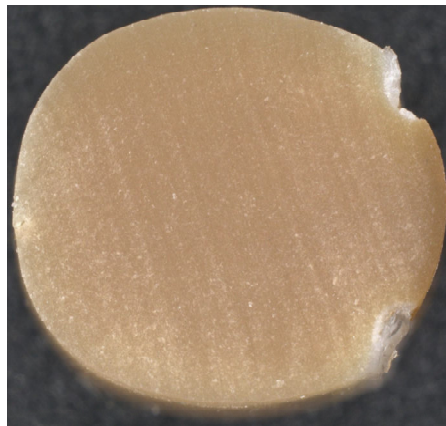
View of an O-Ring cross-section sealing a plasma fitting
